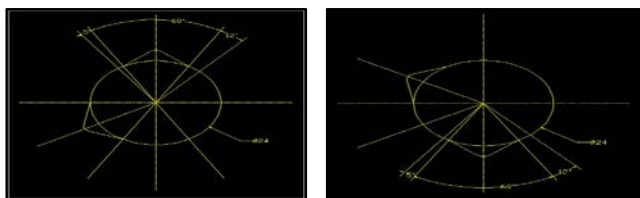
Cam Profile for First Cylinder Inlet Valve and Cam Profile for First Cylinder Exhaust Valve
